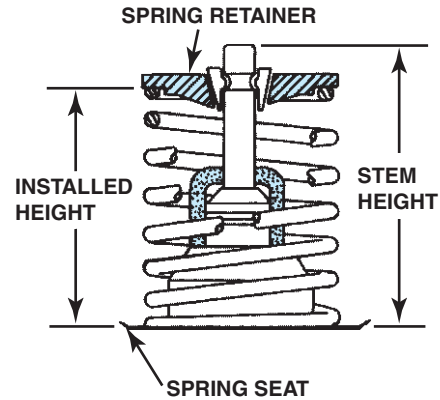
Valve stem height is measured from the spring seat to the tip of the valve after the valve seat and valve face have been refinished. If the valve stem height is too high, up to 0.020 inch can be ground from the tips of most valves.
